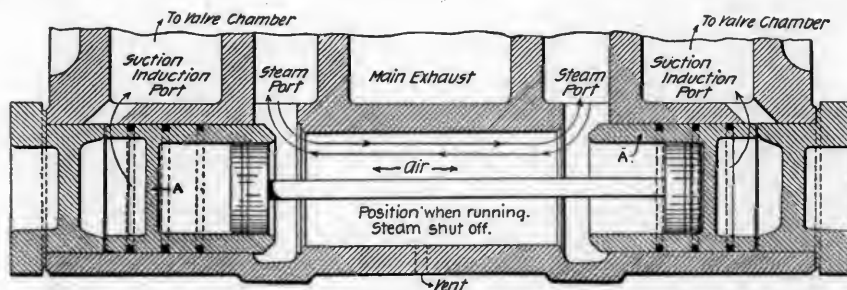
Position of By Pass Valve when Running with Steam Shut Off.
